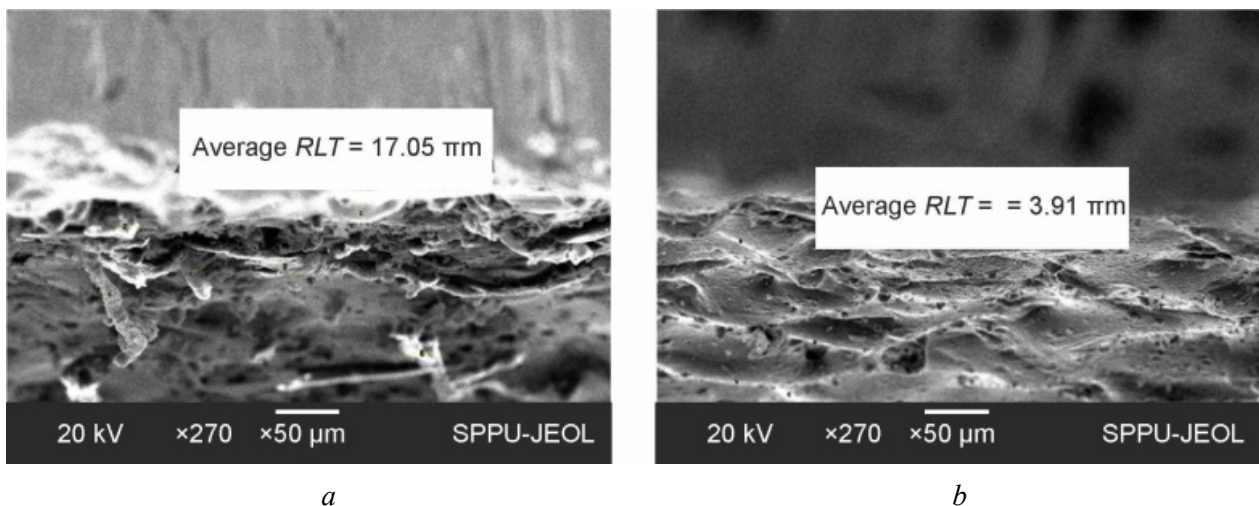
Recast layer thickness (RLT) on ED-machined surfaces using (a) base dielectric fluid and (b) hybrid nano-dielectric fluid
